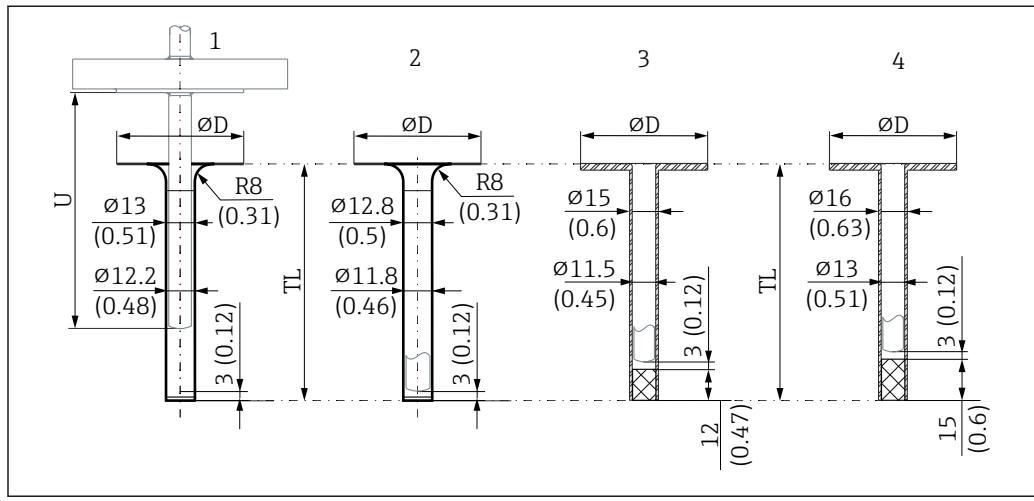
Dimensions of the protective sheath in mm (in) - different versions depending on the coating material
